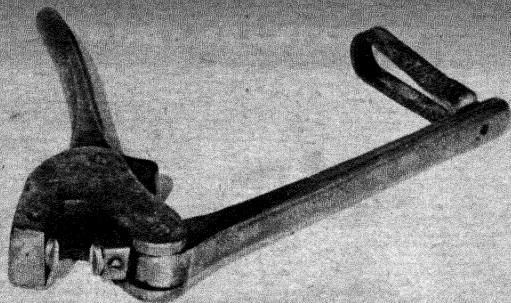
A Hand-Tool adapted for cold welding.
